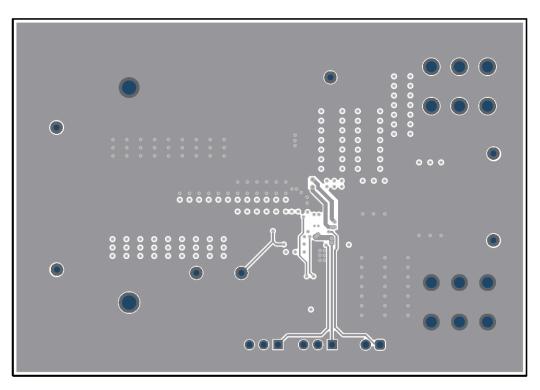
TPS61287EVM-042 Bottom-Side Layout
